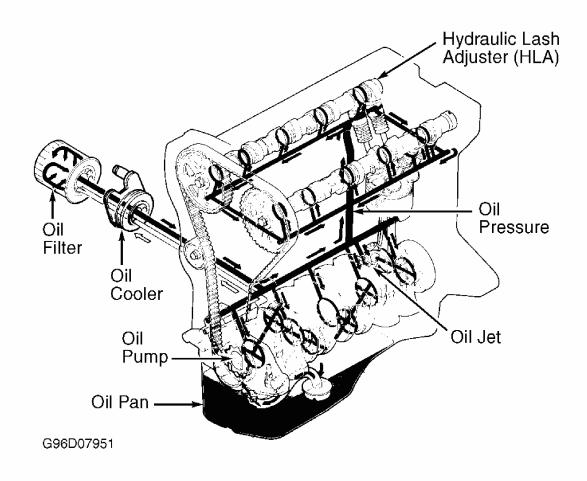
Cross-Sectional View Of Engine Oil Circuit Courtesy of MAZDA MOTORS CORP.
